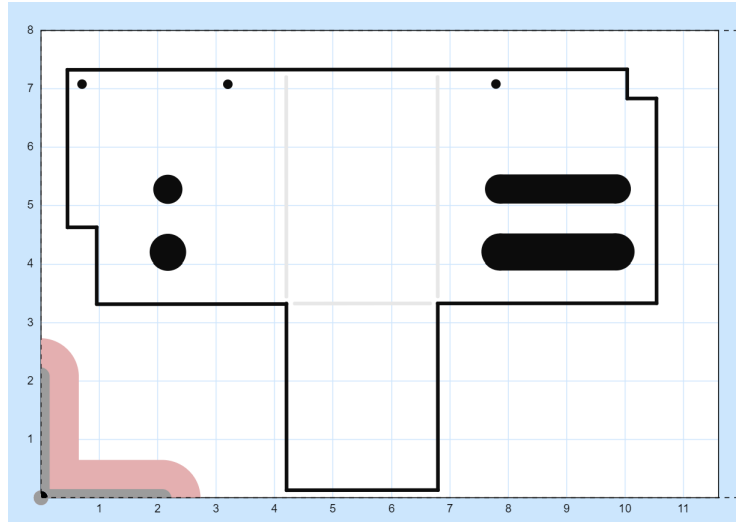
Carvey schematic for aluminium housing. While finalized, the fabrication of the new aluminium housing for the beam translator has not yet occurred. Upon reopening of the William & Mary Business School following the COVID-19 Pandemic, the box will be fully realized. Hole sizes were chosen based on the measured width of the trapping beams.
